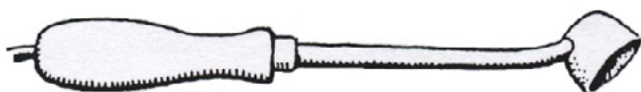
Shape of the first TIG welding torch [23]
